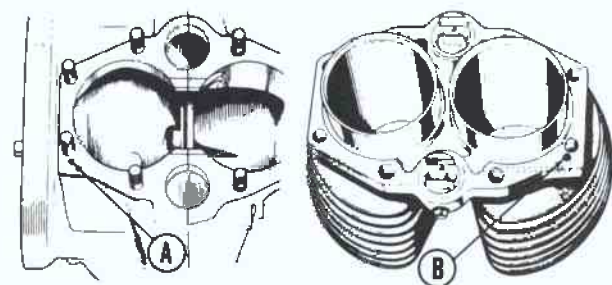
On later 650cc models, make certain hole in cylinder base gasket is over oil passages (A) in crankcase and (B) in cylinder.
